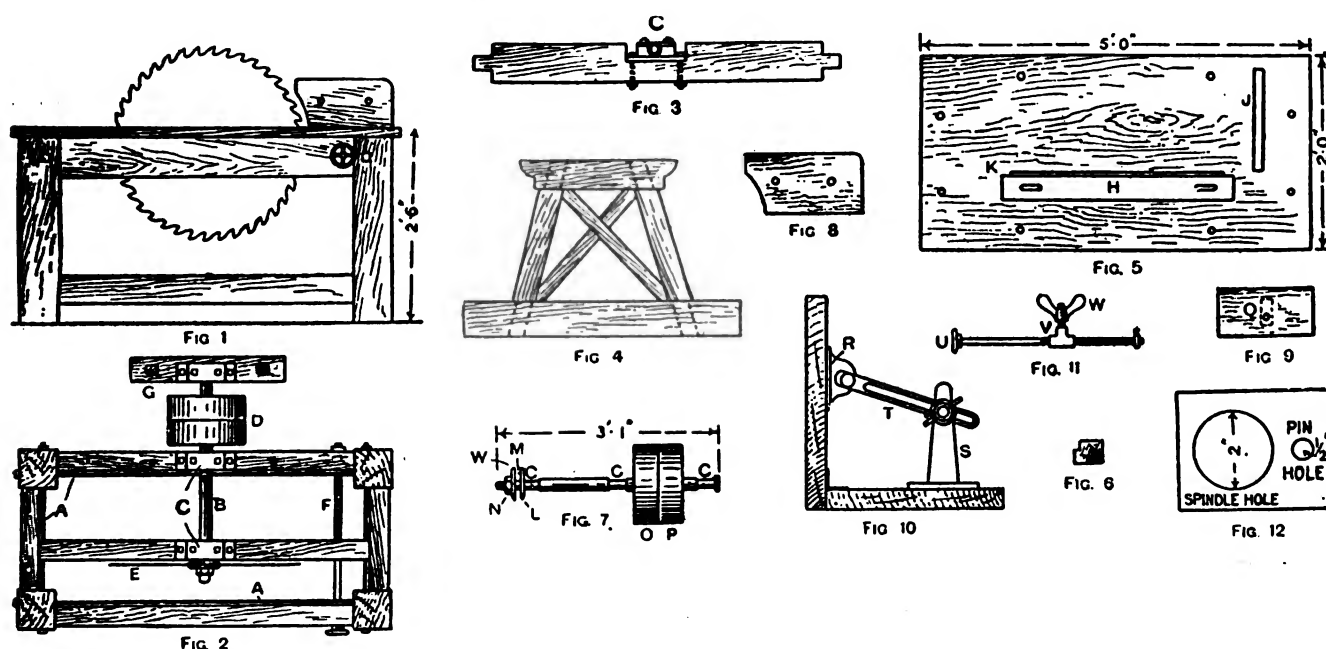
SIDE ELEVATION. FIG. 2—PLANS OF FRAME. FIG. 3—BEARING AND BEARING SUPPORT. FIG. 4—END SUPPORTING HORSE. FIG. 5—TABLE. FIG. 6—PACKING PIECE. FIG. 7—SPINDLE. FIG. 8—ELEVATION OF FENCE. FIG. 9—BASE-PIECE OF FENCE. FIG. 10—ENLARGED VIEW OF FENCE. FIG. 11—ADJUSTING SCREW. FIG. 12—PIN AND SPINDLE HOLES
